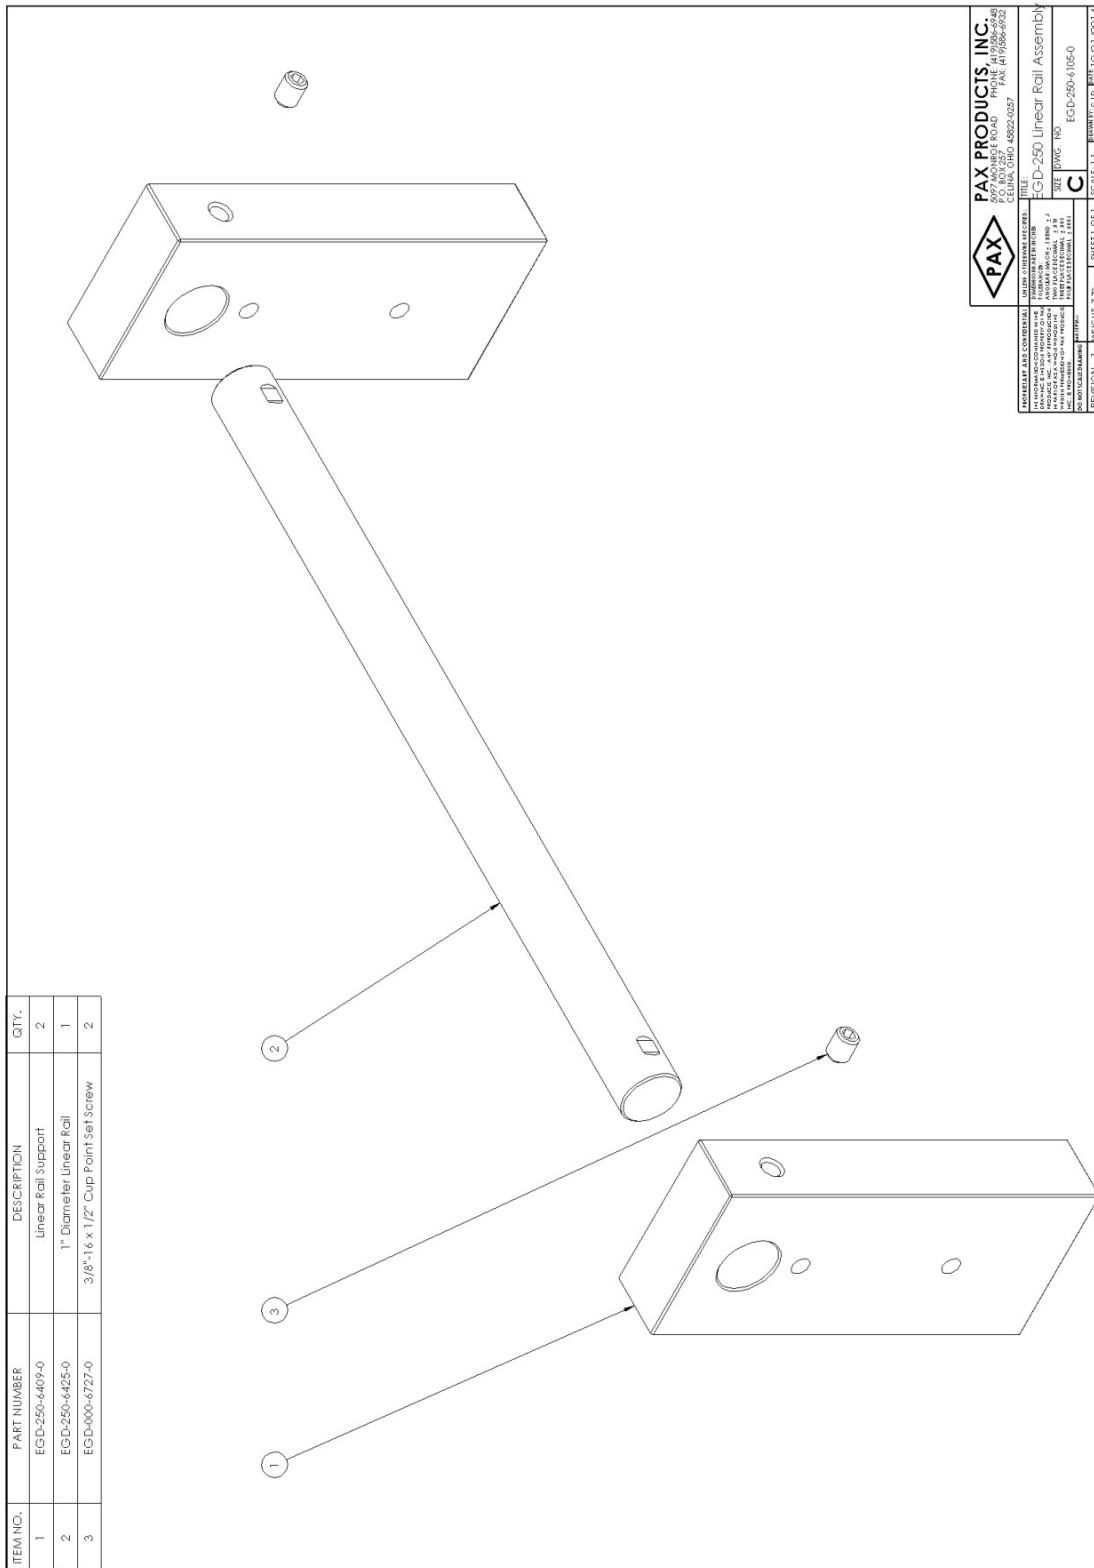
EGD-250 LINEAR RAIL ASSEMBLY
